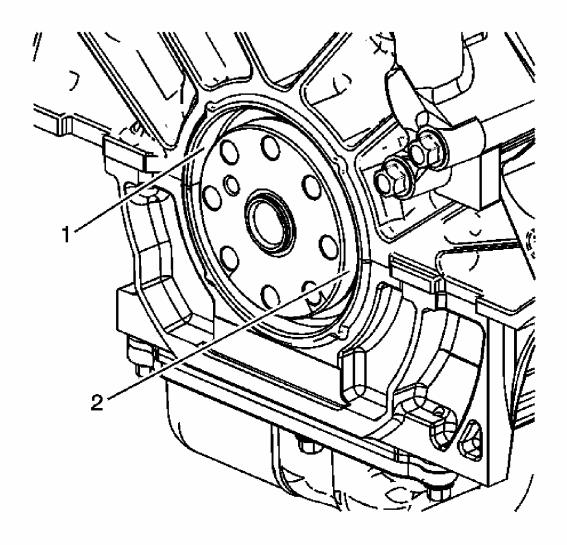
Identifying Rear Crankshaft Seal Bore & Flange Courtesy of GENERAL MOTORS CORP.
